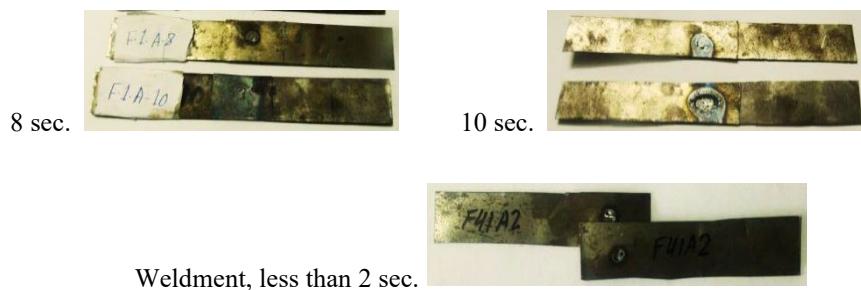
The welding specimens obtained using welding times of 2, 8, 10 sec
